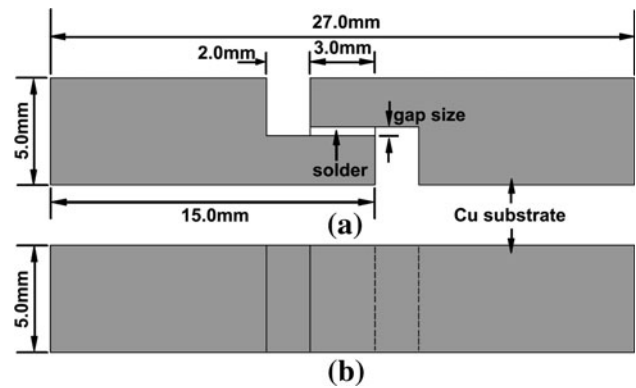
Schematics of lap shear joint: (a) top view and (b) side view.
